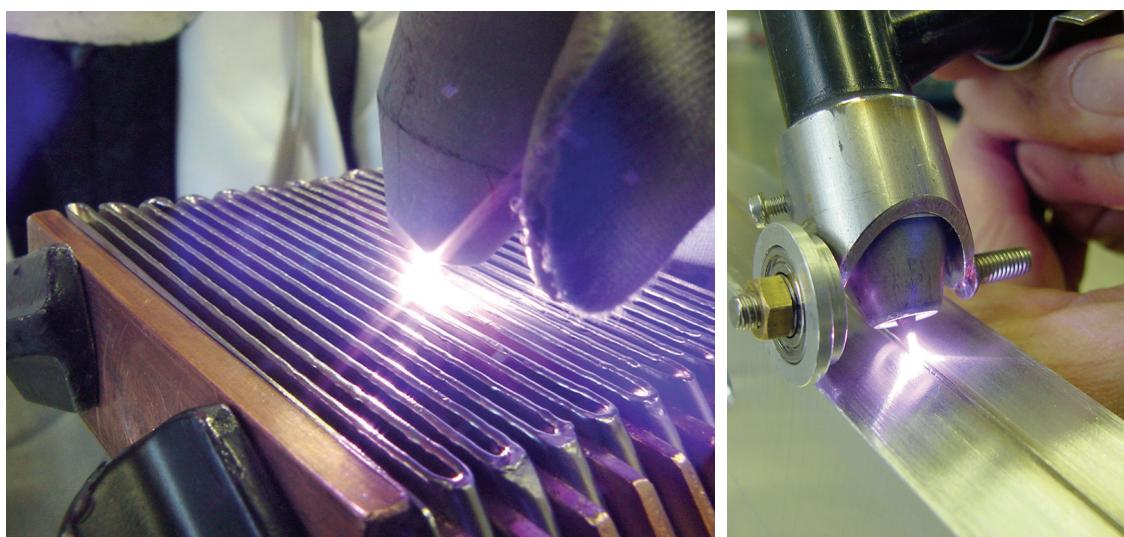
TIG welding of pre-formed metal sheets. [2]
